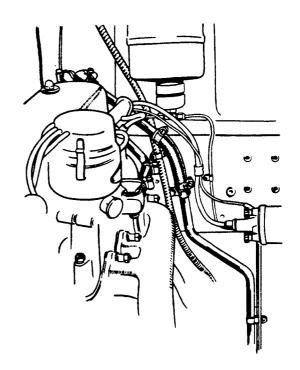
CHASSIS NOS: B.2.AK - B.271.EW RIGHT-HAND DRIVE.
